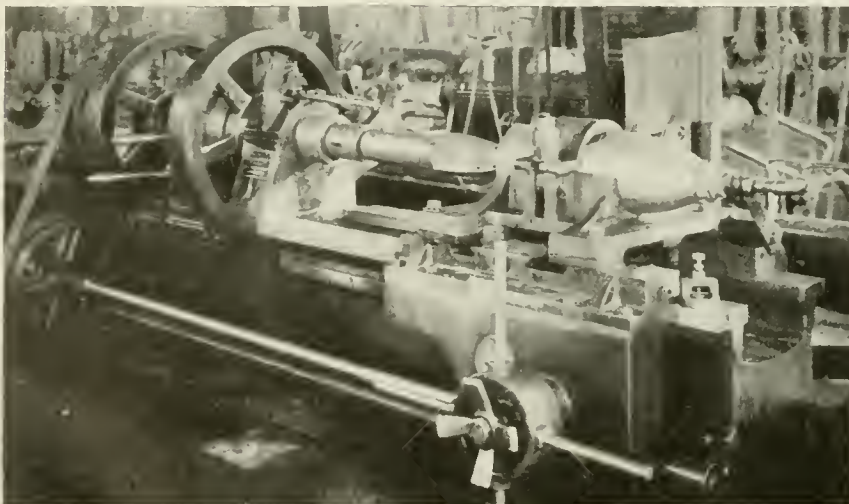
FINISH REAMING ON "JOHNSTON & JENNINGS" LATHES.
